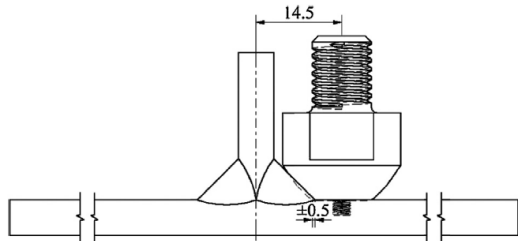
Schematic representation of weld/tool relative position during processing (dimensions in mm).
